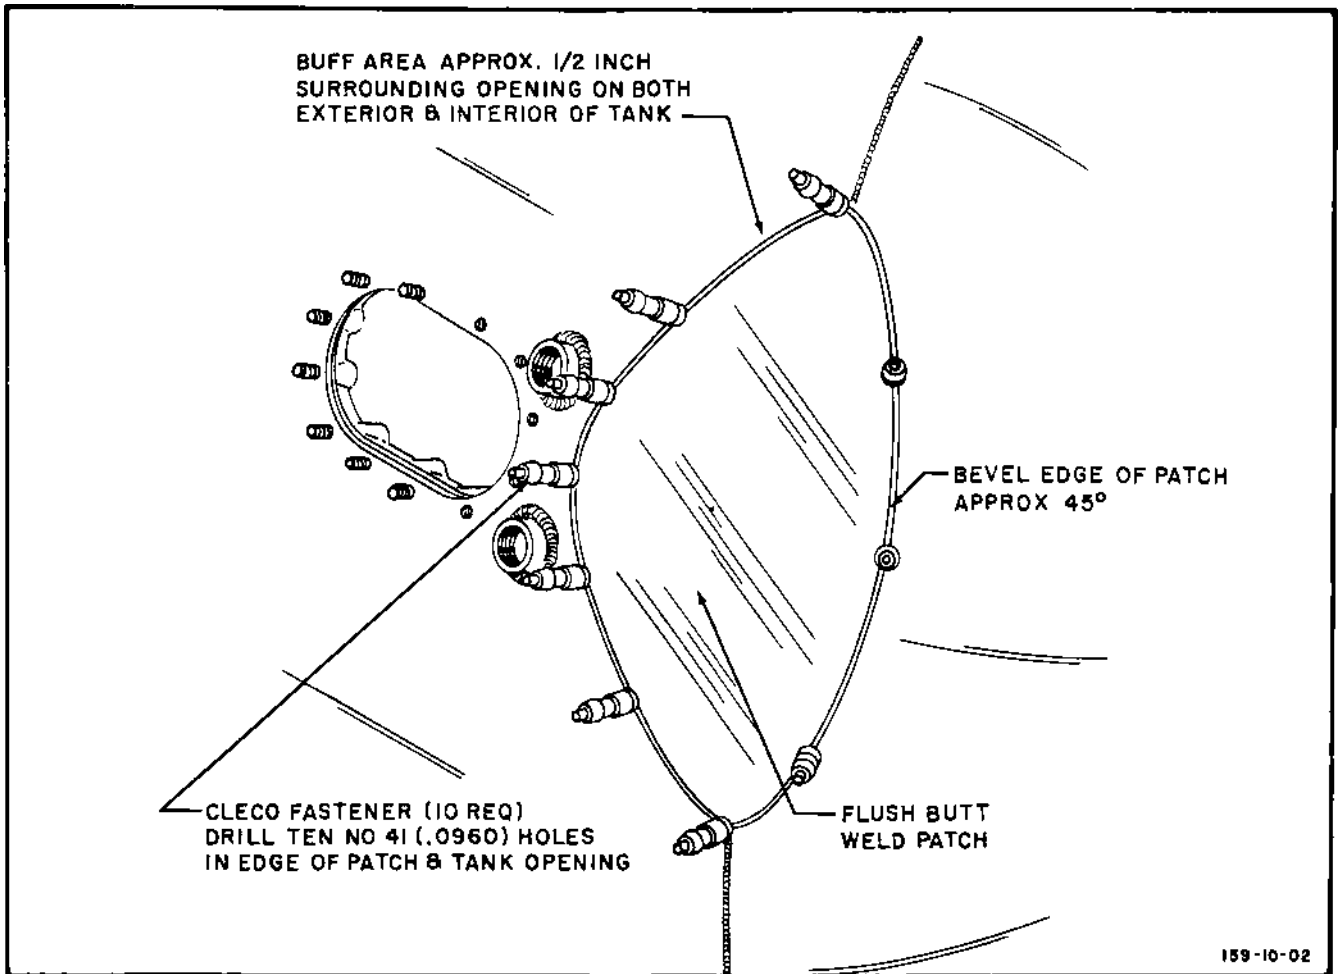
BUTT WELD FLAT PATCH FITTED IN PLACE PRIOR TO WELDING
